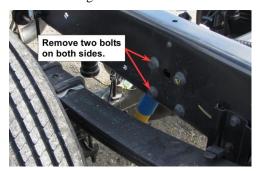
Remove Two Bolts from Both Sides of Vehicle
